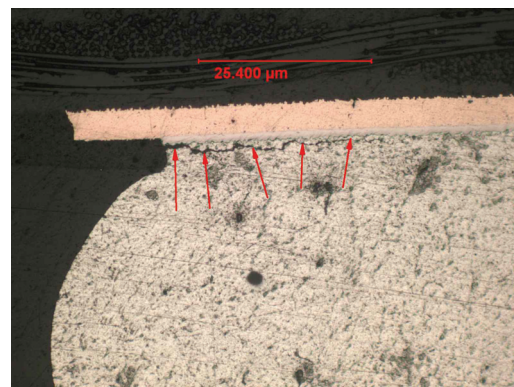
Tin Lead (SnPb) U44 BGA Solder Crack
